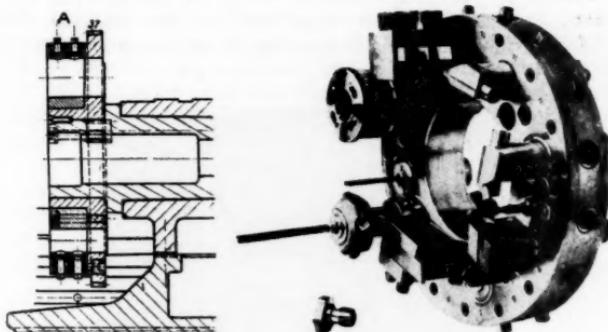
Interchangeable head (Pittler horizontal turret lathe).
